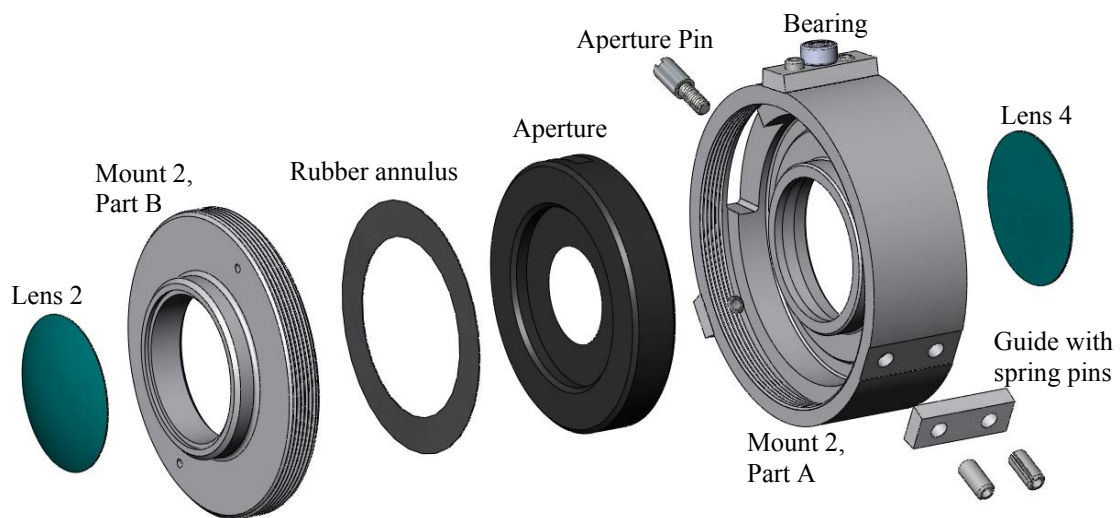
Exploded view of prototype 3.4 mount two for lenses 2&4 and the aperture.
